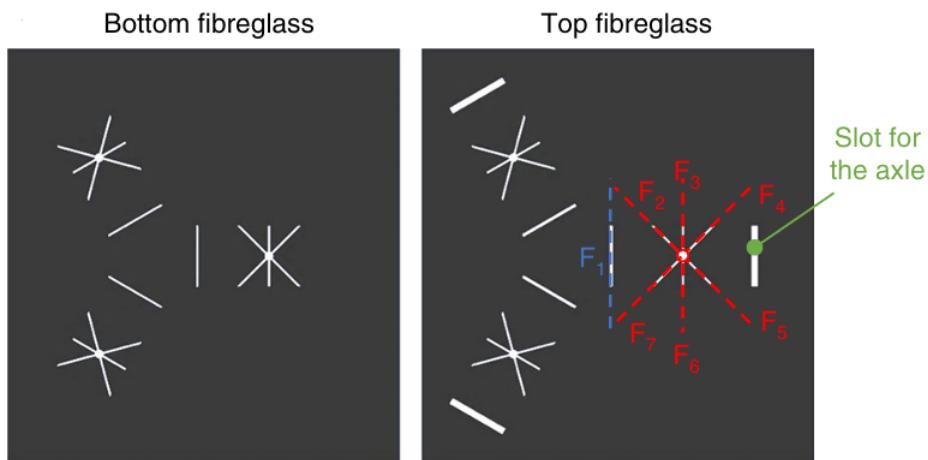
Bottom And Top Fibreglasses Cutting Sketch
